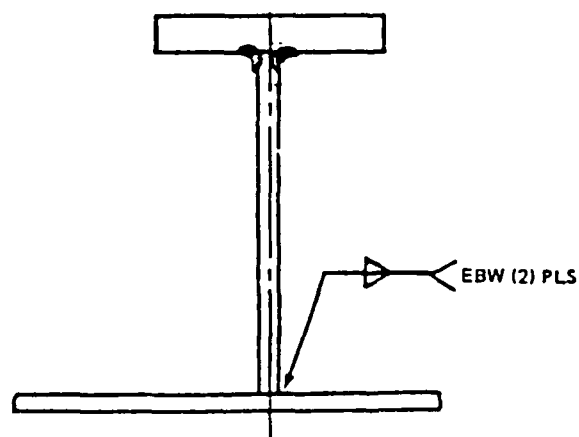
T-STIFFENER TO PANEL ASSEMBLY -
